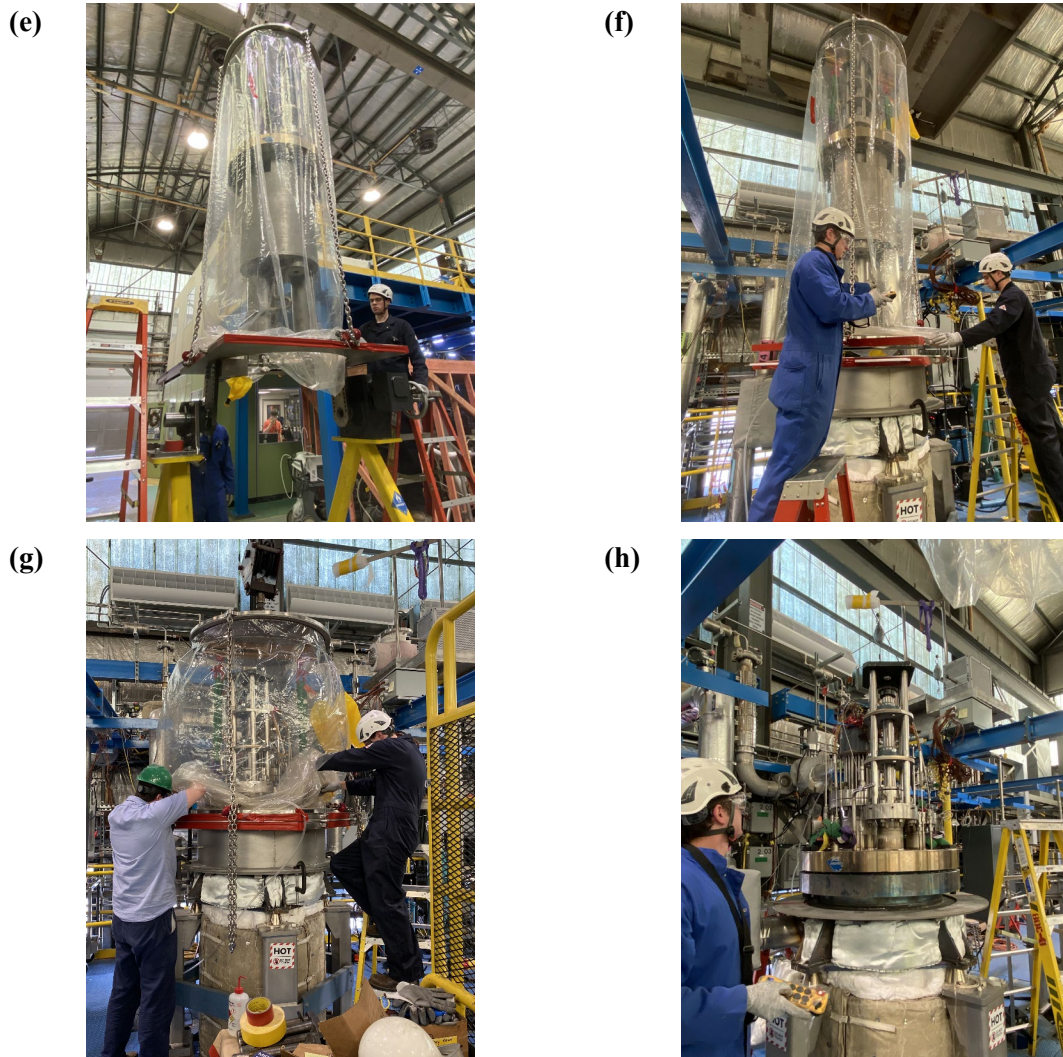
Operation of the 28” Flexicask system to replace THETA back into METL test vessel #4 after cleaning and reassembly. Steps have been described in detail in the text.
